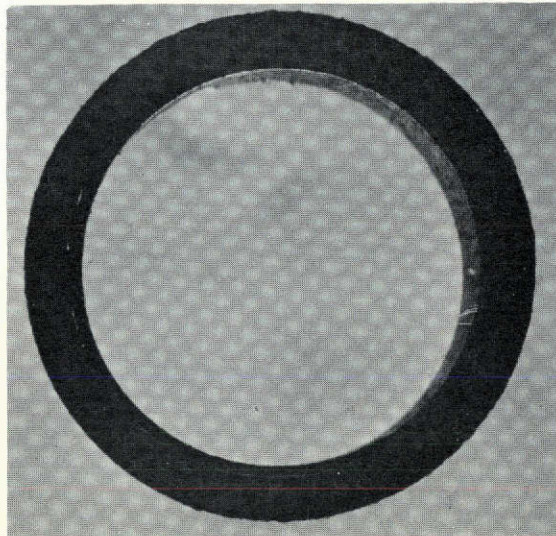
TRANSVERSE CROSS OF TAPERED WALL SLEEVE (9X)
